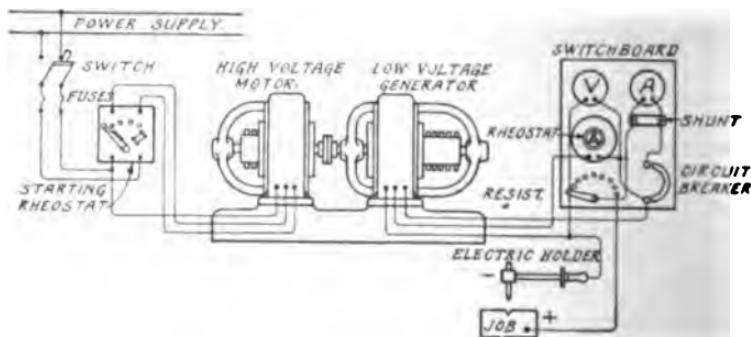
Standard Layout and Connections for Low-Voltage Motor-Generator Welding Outfit
